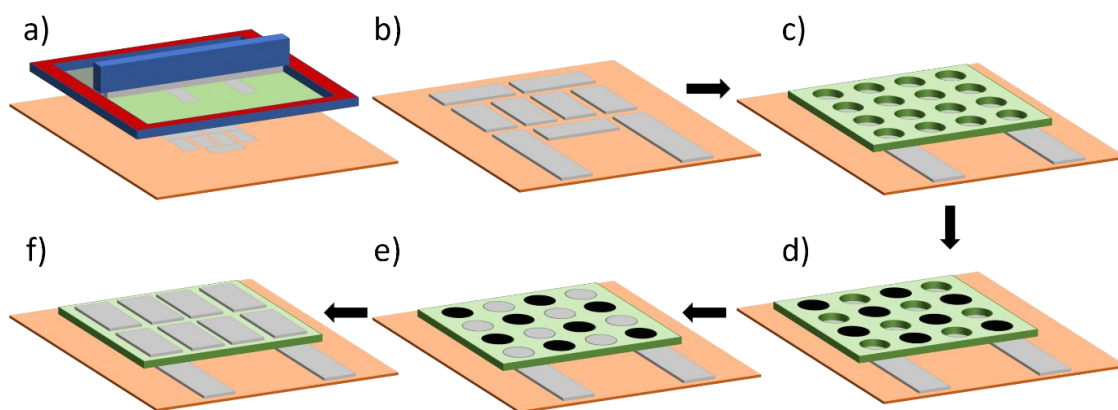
a) Sketch drawing of the screen-printed technique. b) Printed bottom silver contact layer. c) Printed insulator layer. d) Printed p-type material (Graphene, PEDOT:PSS) legs layer. e) Printed silver legs layer. f) printed top silver contact layer. Figure from ¹⁵¹ Licence CC-BY.
